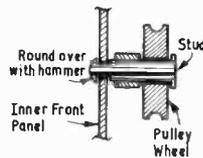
Section through the pulley assembly riveted to holes J in the plate in Fig. 14
